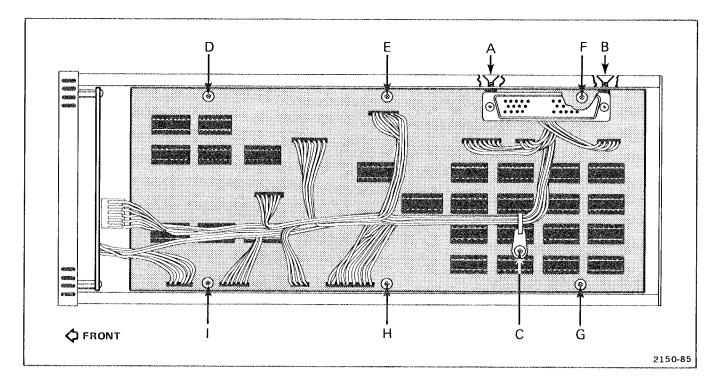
Locations of securing screws and hardware mounting screws on A4 Acquisition circuit board.
